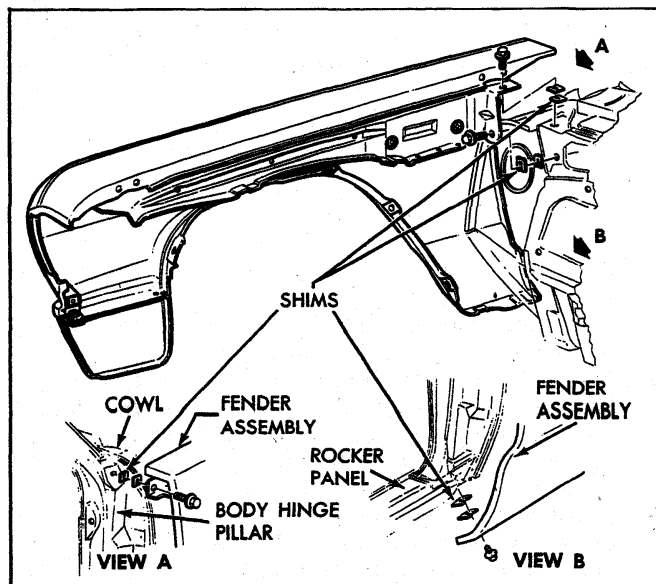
Fender to Cowl and Rocker Panel Shimming
